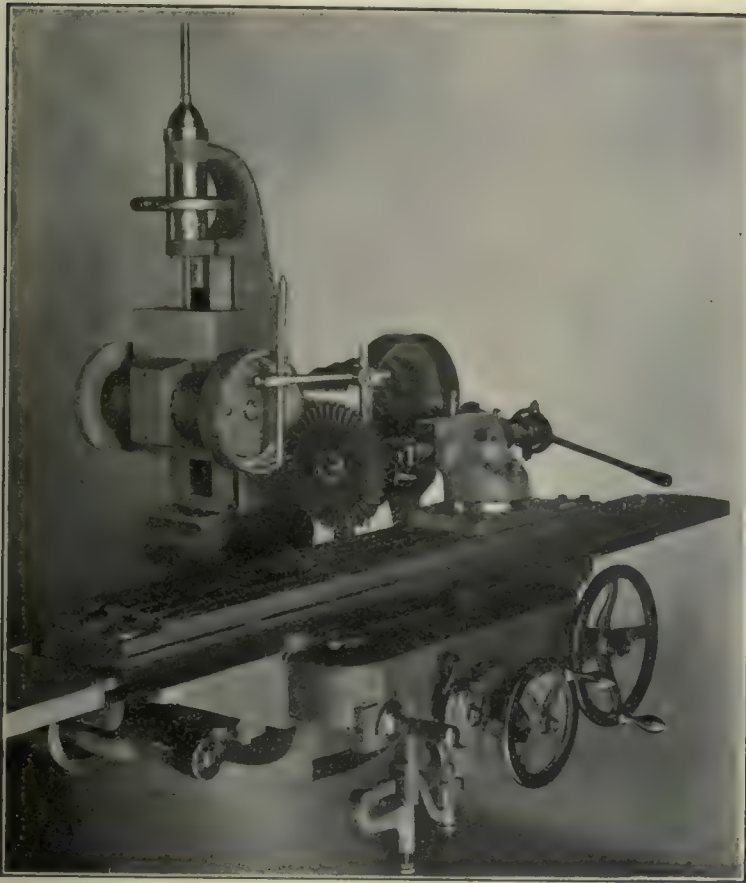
Setting for Grinding the Face of a Side Milling Cutter.
